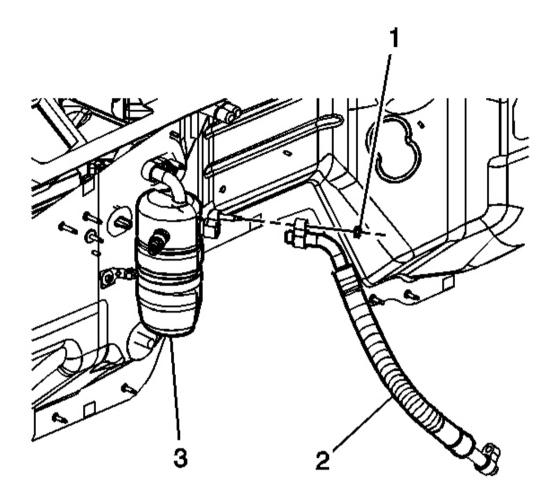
Suction Hose & Accumulator Courtesy of GENERAL MOTORS CORP.
